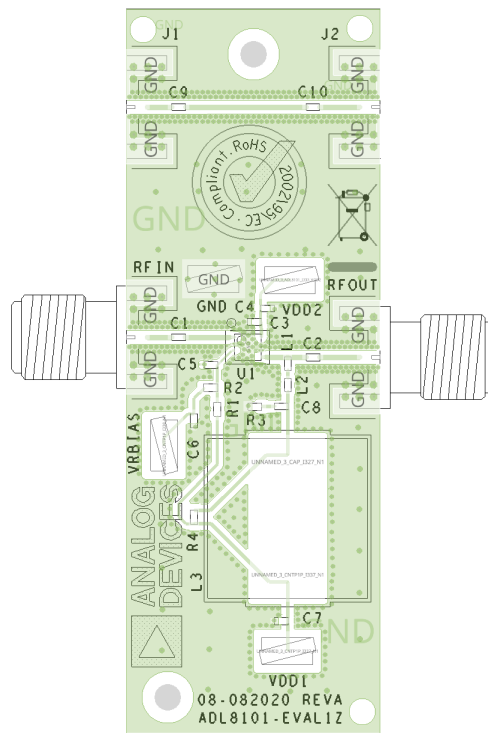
ADL8101-EVAL1Z Assembly Drawing (J1 and J2 Not Installed)
